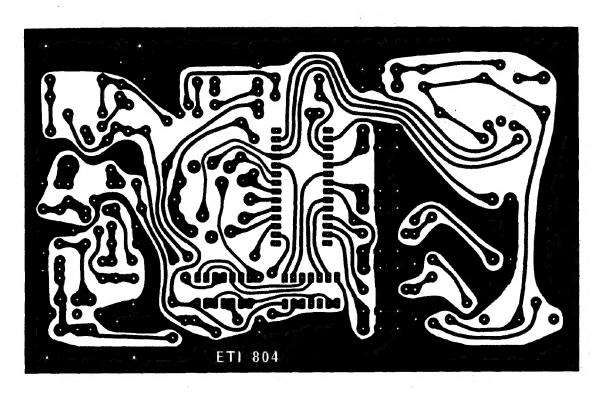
Printed-circuit layout. Full size 163mm x 102mm.
